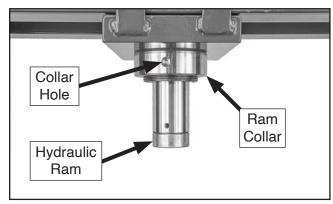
Hydraulic ram secured to mounting plate with ram collar.
